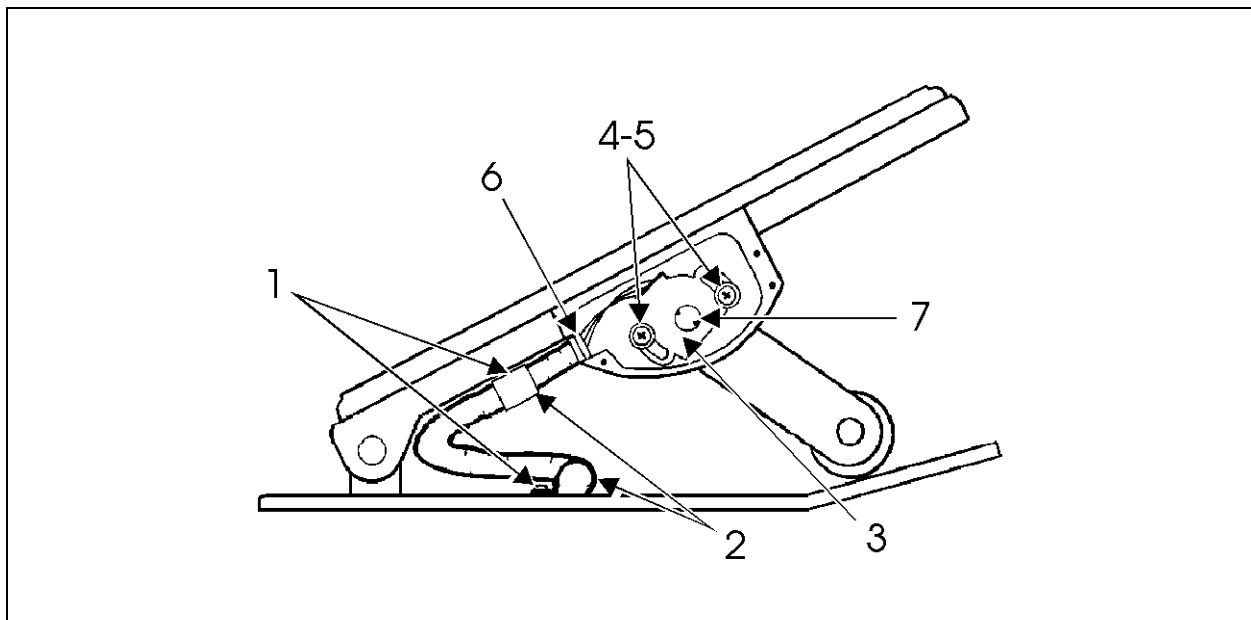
ELECTRONIC FOOT PEDAL ASSEMBLY
